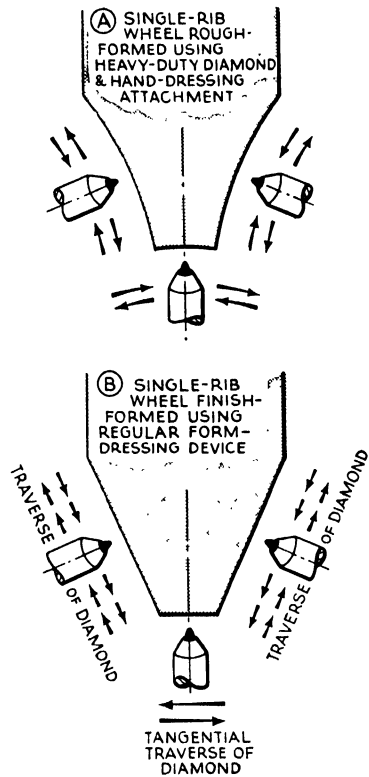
STAGES IN FORMING AND FORM-DRESSING A SINGLE-RIB WHEEL
